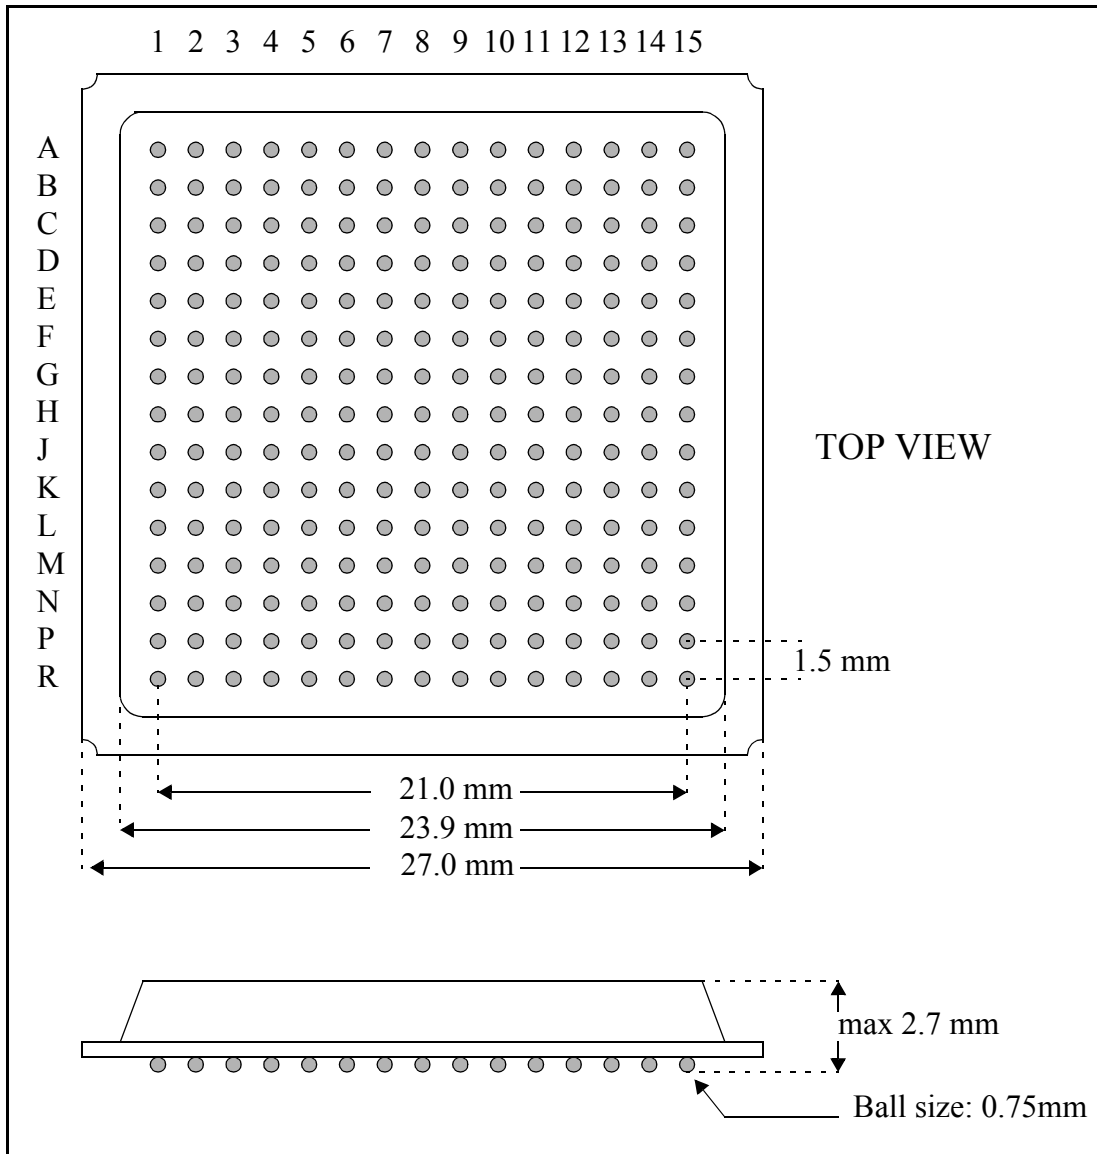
Mechanical dimensions of plastic BGA 225 package.
